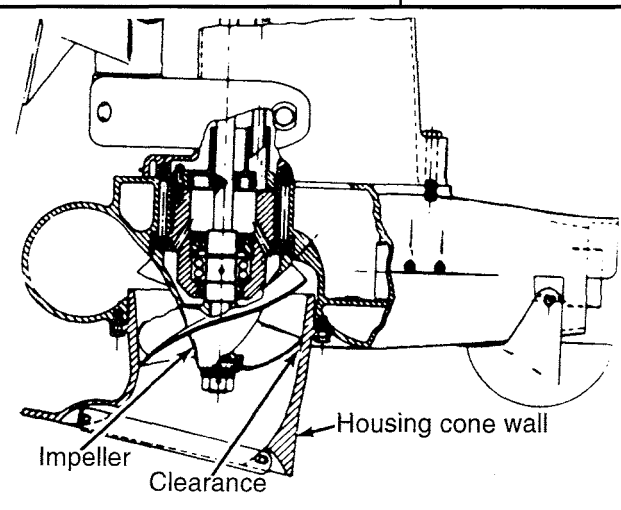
Jet drive impeller clearance is adjusted by shimming the impeller higher or lower in the housing. Usually, moving the impeller downward (moving shims from below to above the impeller) decreases clearance
